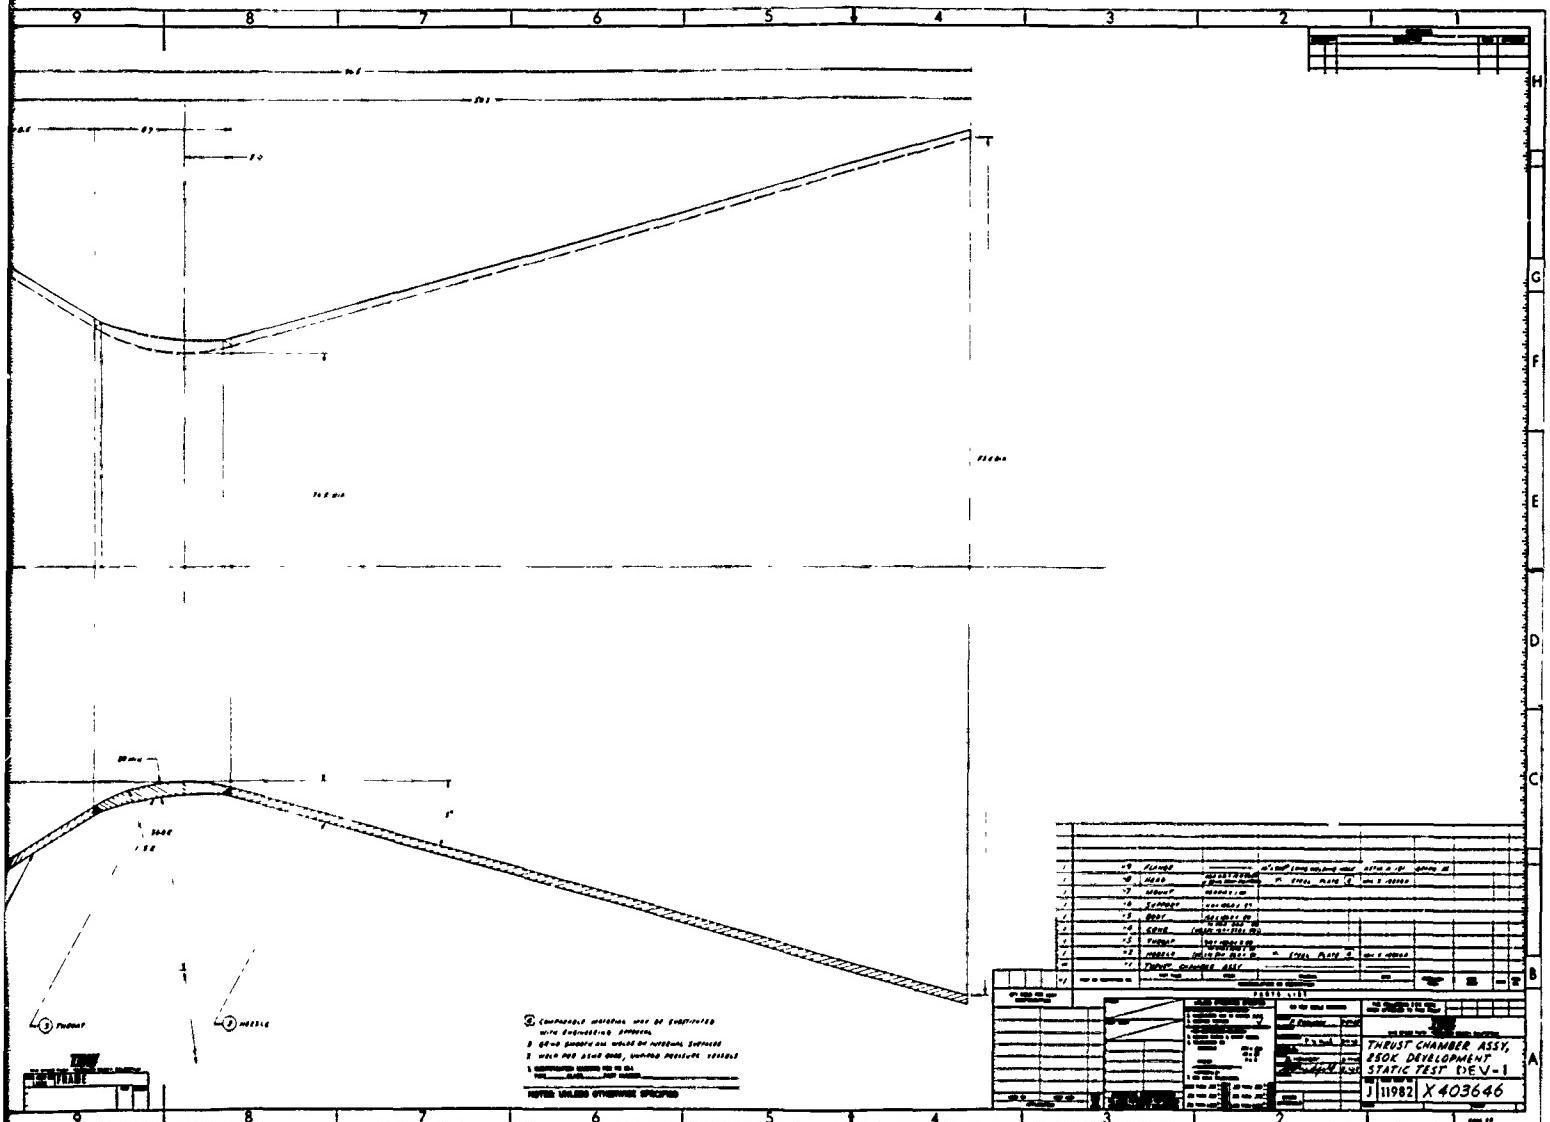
250,000-lb_f Thrust Chamber Assembly (DEV-1)
